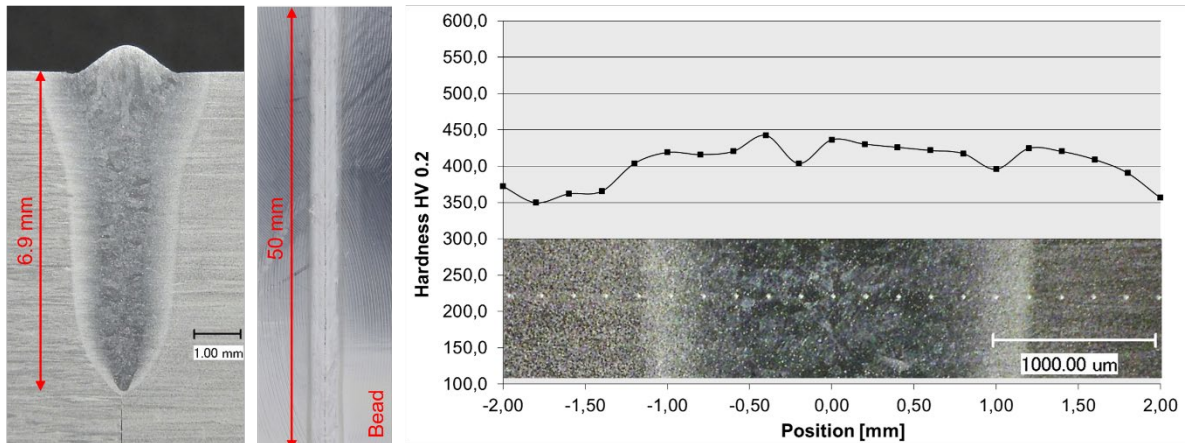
Titanium Ti6Al4V Bead on plate: 1800 W, 0.75 m/min, 5 mbar – achieved weld-in depth of 6.9 mm
